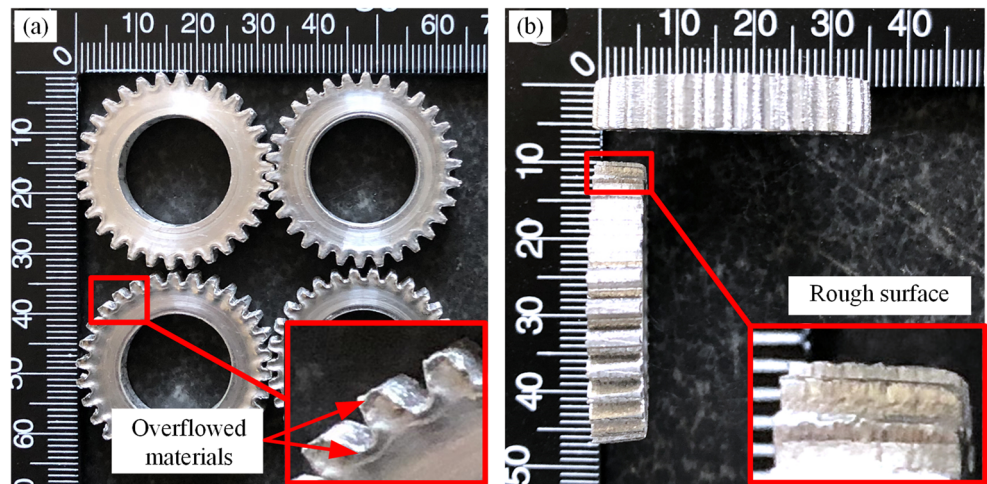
Tooth morphology on the gear samples obtained by using a revised rollers and b unrevised rollers
